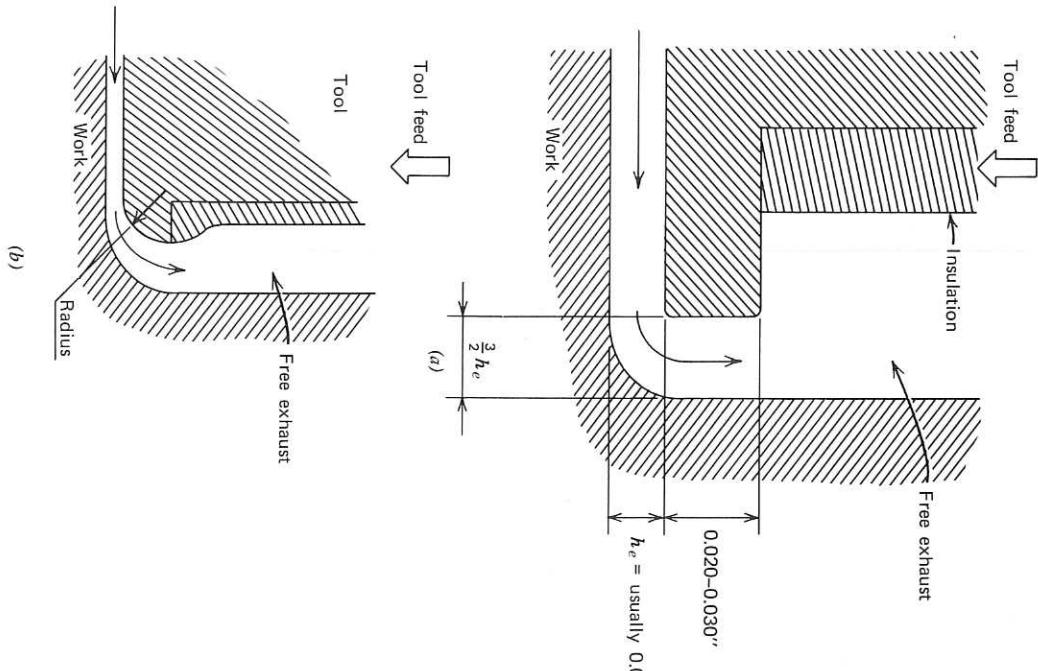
(a) Size of overcut for a generating tool. (b) Design of a generating tool to produce a corner radius.
